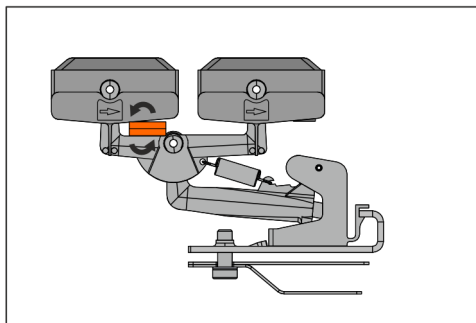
Loosen the second collector head with a rotary movement of the aid to be able to remove the first double sliding contacts.
